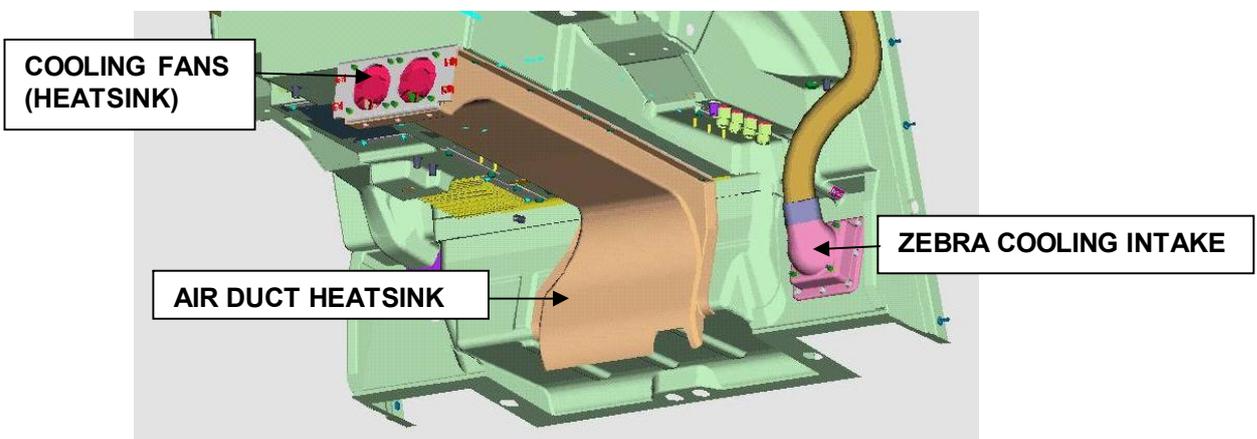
Rear Tub bottom with Airducts for ZEBRA cooling and Heatsinks
